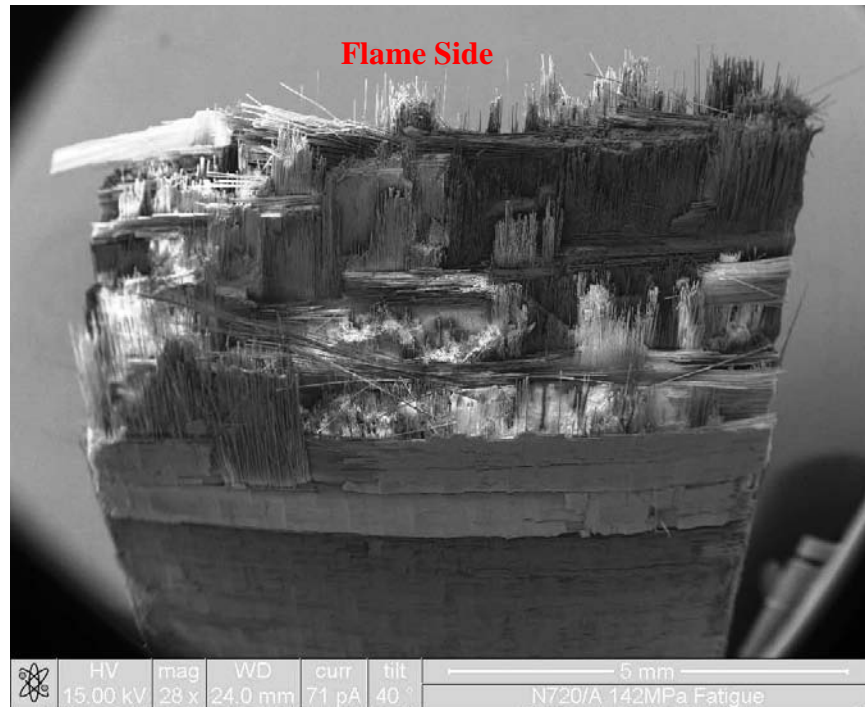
142 MPa Fracture Surface (Rear Looking Towards Flame Side)
